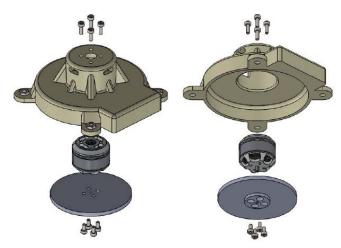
Detailed view of reaction wheel assembly (brushless motor, inertial mass and housing)
